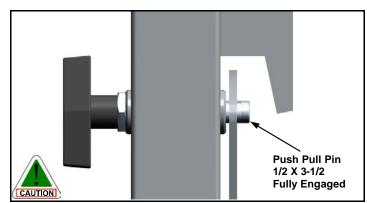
Caution: Check that the two Push Pull Pins 1/2 X 3-1/2 (#38) located on the Press Bar Selector Housing (#7), and the Front Upright (#5) are fully engaged into the selected holes of the Press Bar (#6), and the Back Pad Bracket (#12).
